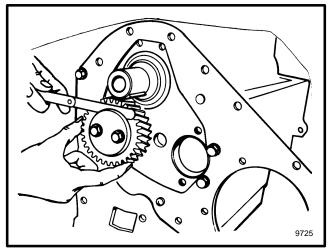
CHECK THE CLEARANCE BETWEEN THE IDLER GEAR AND THE RETAINER PLATE
